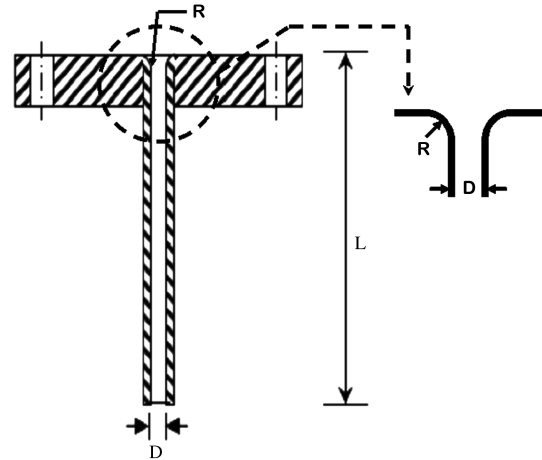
Sketch of the nozzle geometry used in the present investigation.
